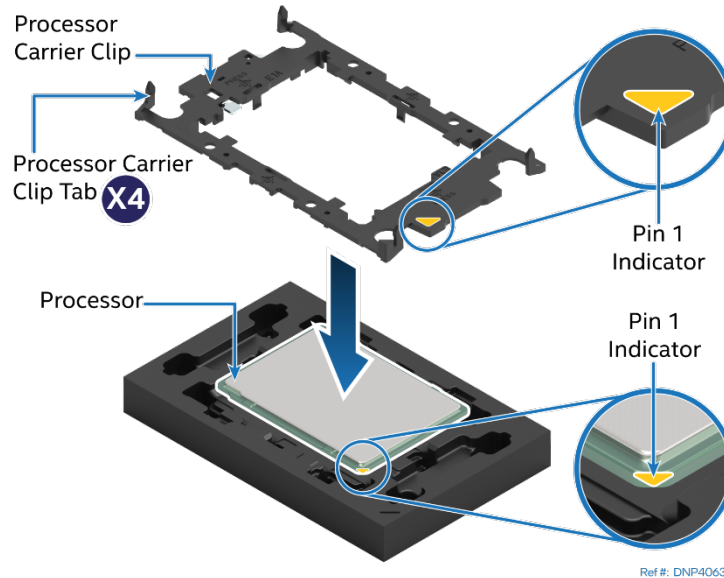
Installing the Processor Carrier Clip onto the Processor – Part 1
